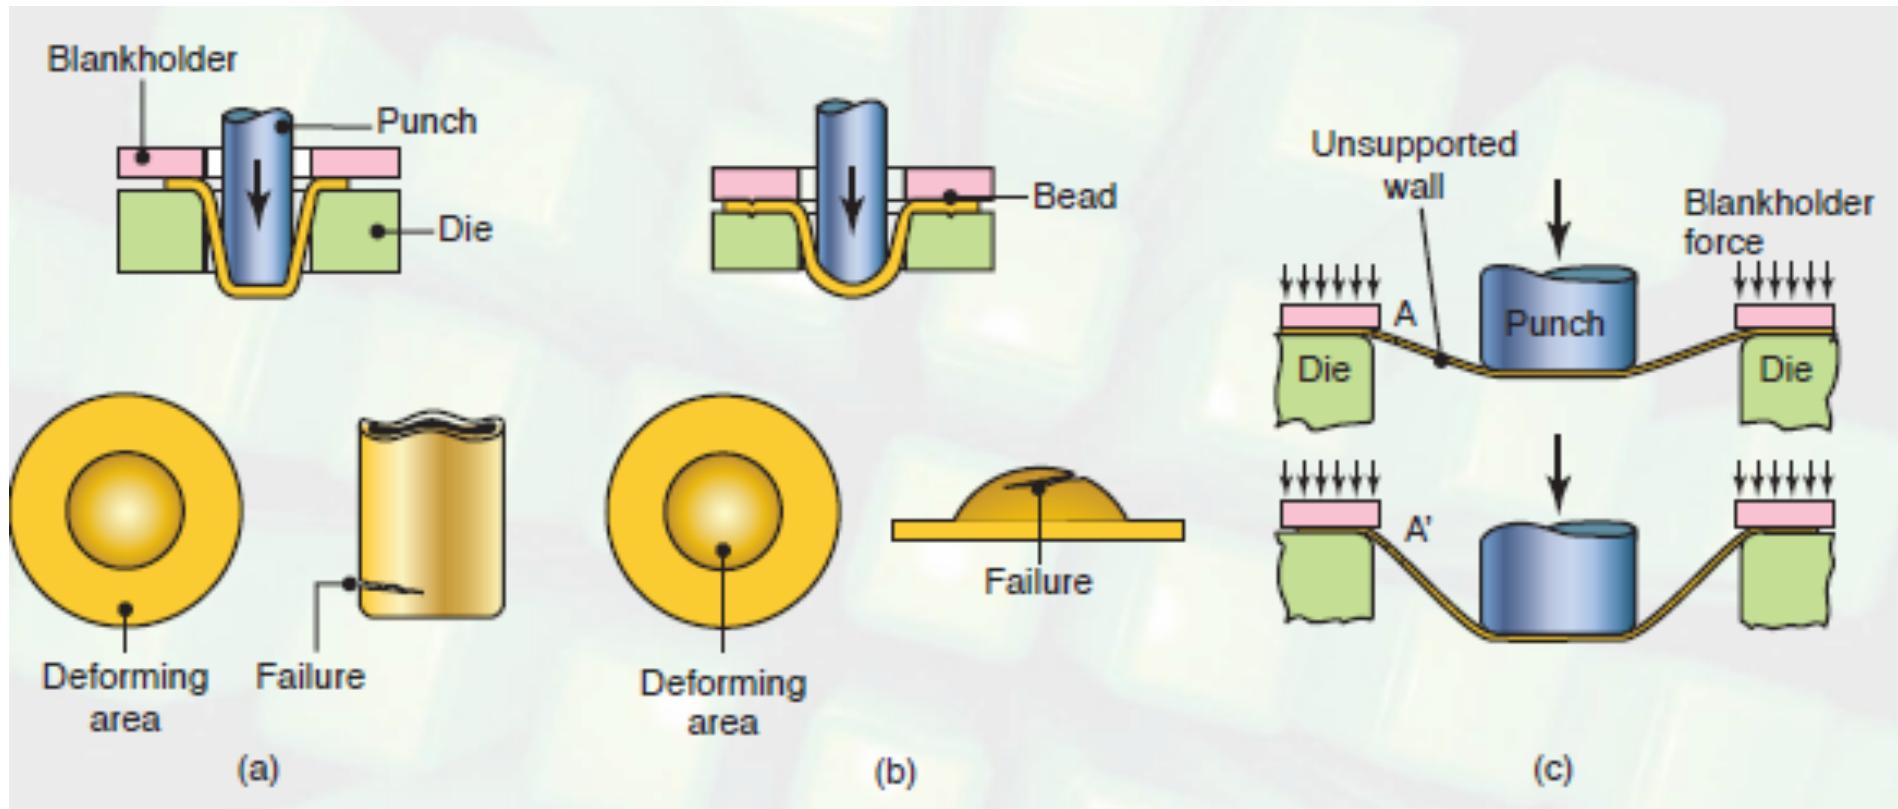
Examples of (a) pure drawing and (b) pure stretching; the bead prevents the sheet metal from flowing freely into the die cavity. (c) Unsupported wall and possibility of wrinkling of a sheet in drawing. Source: After W.F. Hosford and R.M. Caddell.
